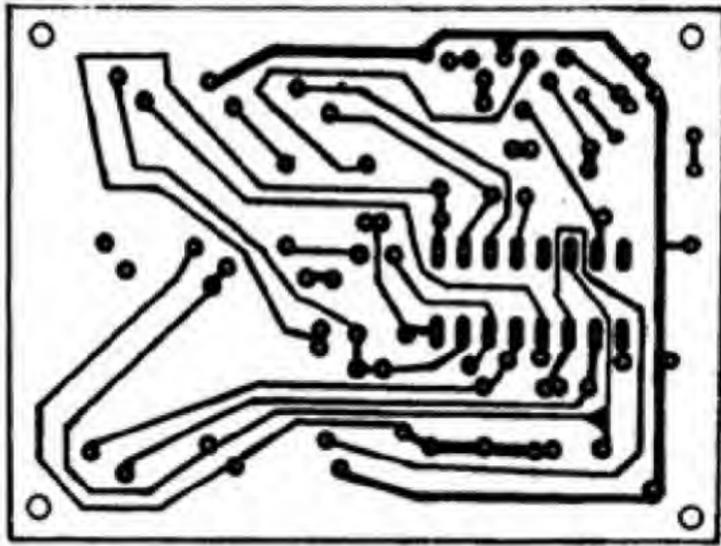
Actual-size PCB layout for the circuit shown in Fig. 1. Fig. 3: Components layout for the PCB shown in Fig. 2.
